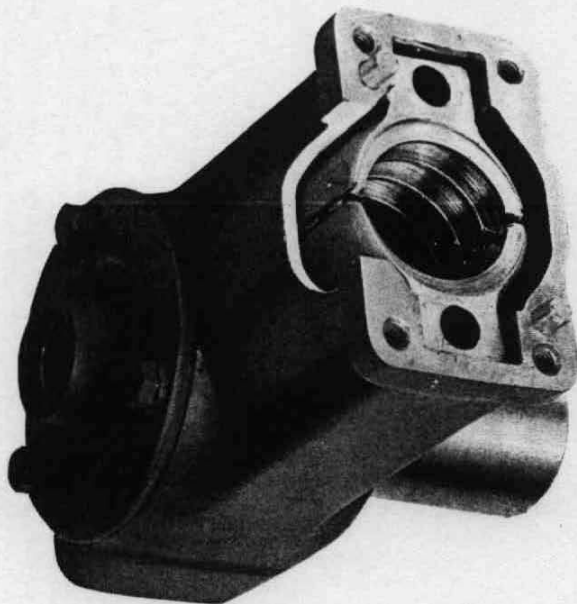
1928 Steering Gear. Half Nuts Guided at Back Only.
